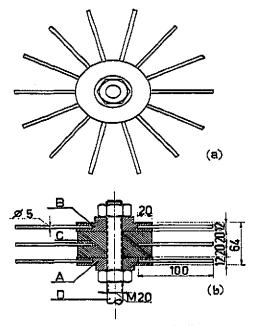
(a) Top view of the winding apparatus. (b) Cross-section of the winding apparatus (dimensions in millimetres).
